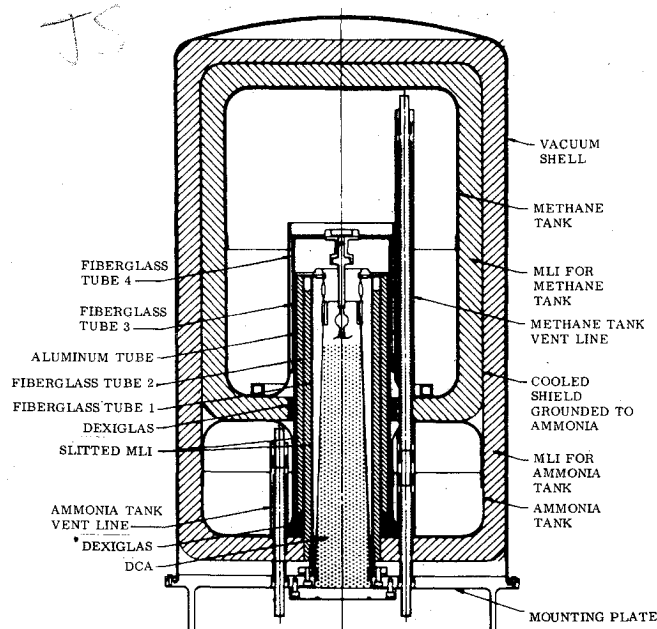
Physical configuration of Nimbus F solid cryogen cooler.
